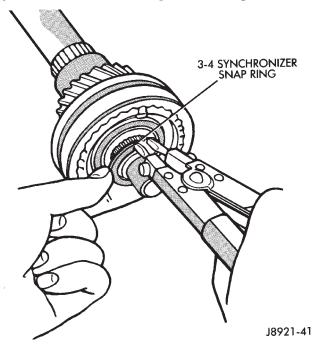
Remove 3-4 Synchronizer Snap Ring
